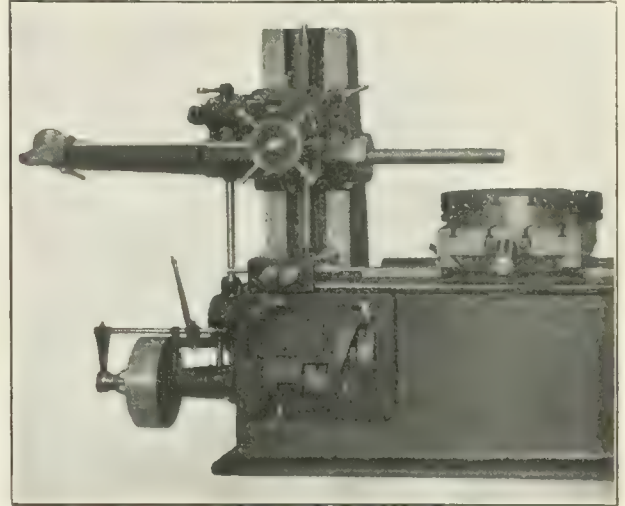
Front View of the Horizontal Boring Mill Built by the Cleveland Machine Tool Works, Cleveland, Ohio.
